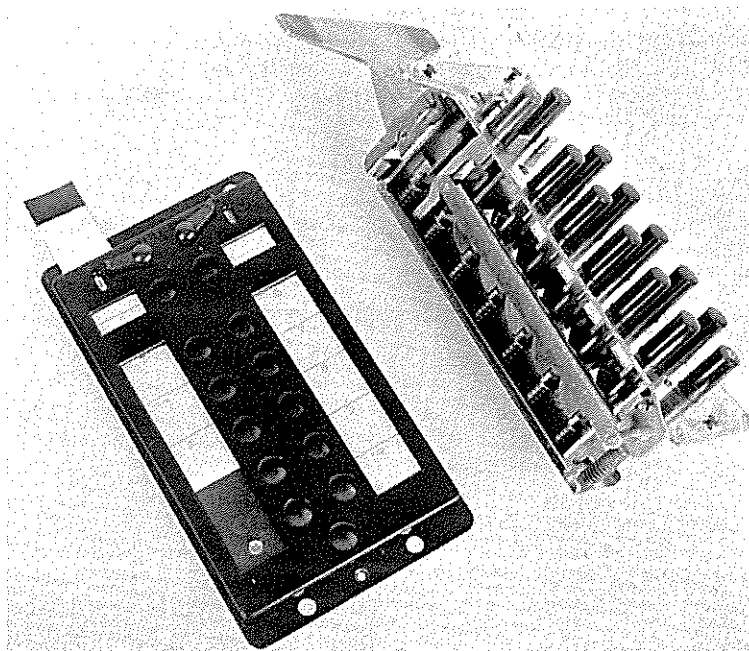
KEY PLATE REMOVED FROM KEY ASSEMBLY (ALSO SHOWS
